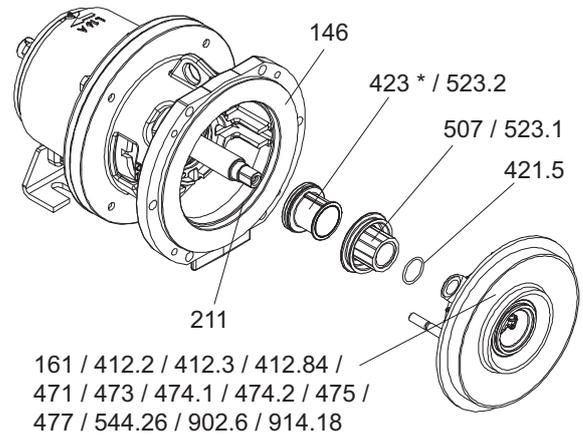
Removing the ALFA-KSS-RS cover casing sub-assembly and atmosphere-side shaft sleeves
